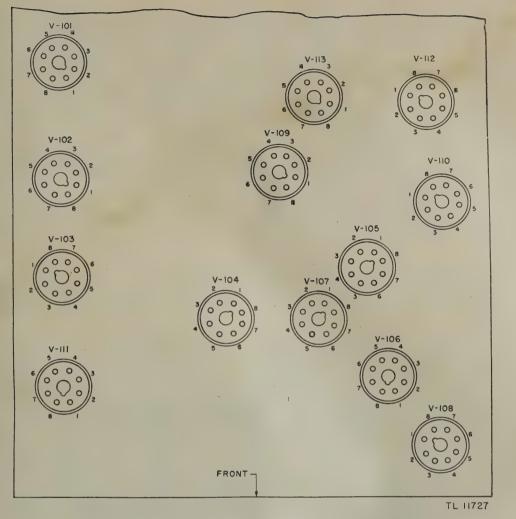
Radio Receiver BC-1147-A, socket pin locations, top view.
